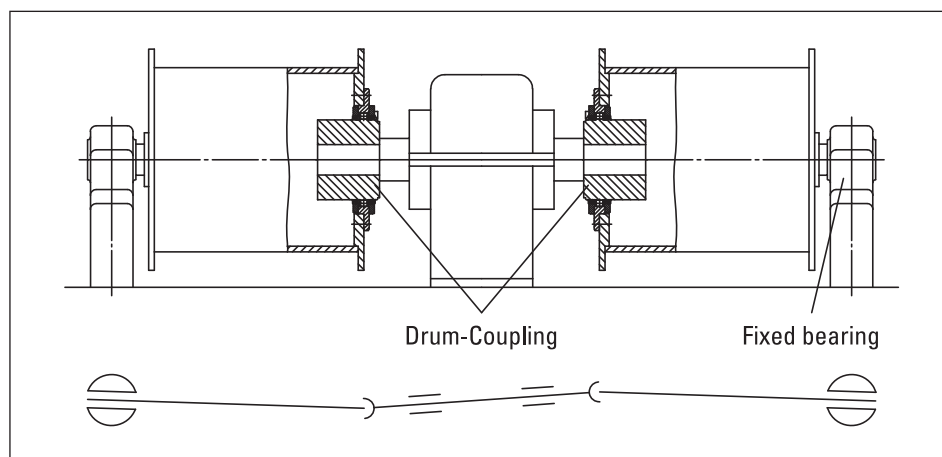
Layout of a twin-drum drive with a Drum-Coupling.
